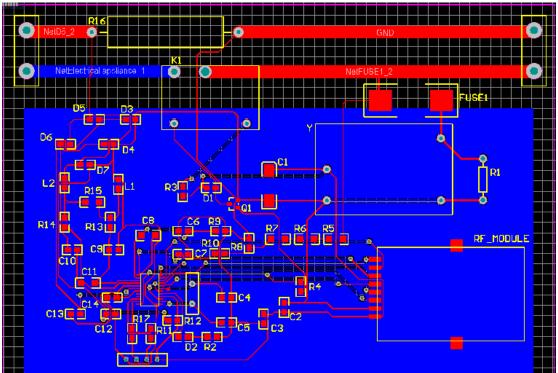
below shows the PCB layout of the whole circuits on the Smart-plug electrical board.
